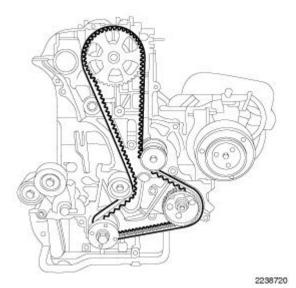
Exploded View Of Timing Belt Courtesy of CHRYSLER LLC
